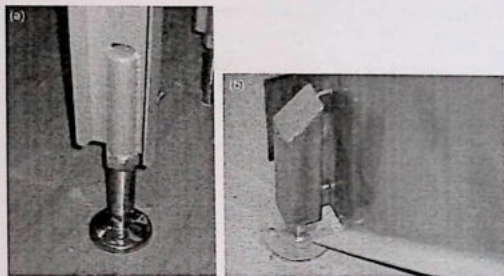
(a) Pivotal machine leveling mount from which the threaded spindle is completely concealed in a closed pipe that is in-welded in a sheet metal leg. (b) Stair riser legs, totally sealed, with sloped top and set off the riser. (a) courtesy of Den Rustfri Stålindustrijs Kompetencecenter. (b) courtesy of Joe Stout.
